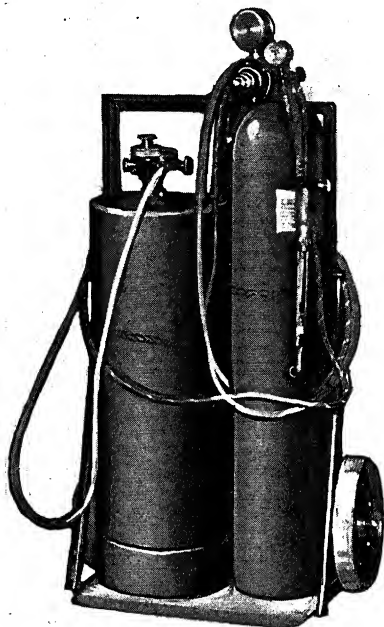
illustrates a welding unit most suitable for field use. The unit consists of two steel cylinders, one each of compressed acetylene and oxygen, welding blow-pipe, necessary regulators, hose, etc. The entire outfit is mounted on a two-wheeled truck and is easily and quickly moved from place to place as required.
